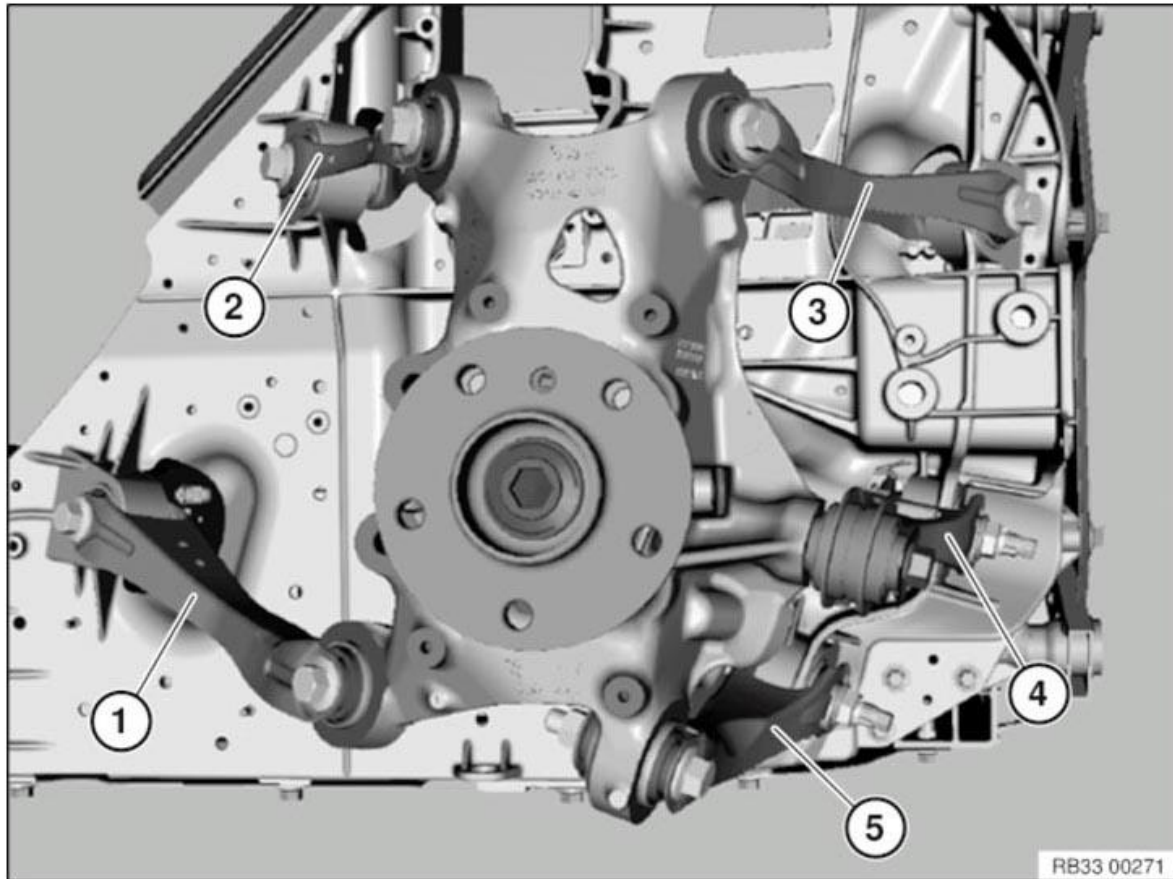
Identifying Rear Axle Wheel Alignment Related Components
